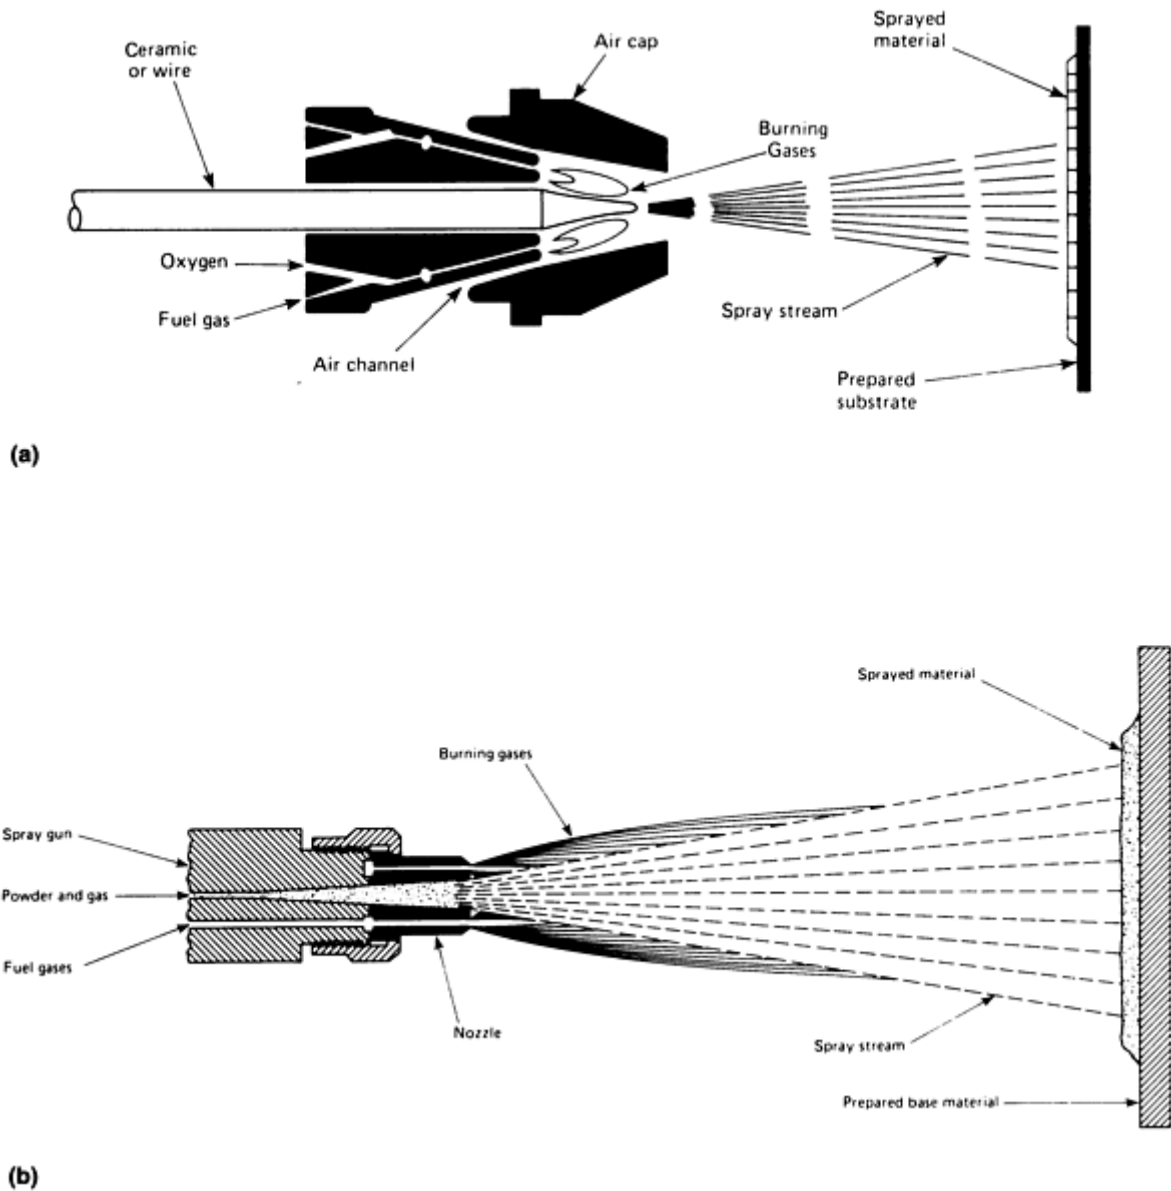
Cross sections of typical flame spray guns. (a) Wire or rod. (b) Powder
